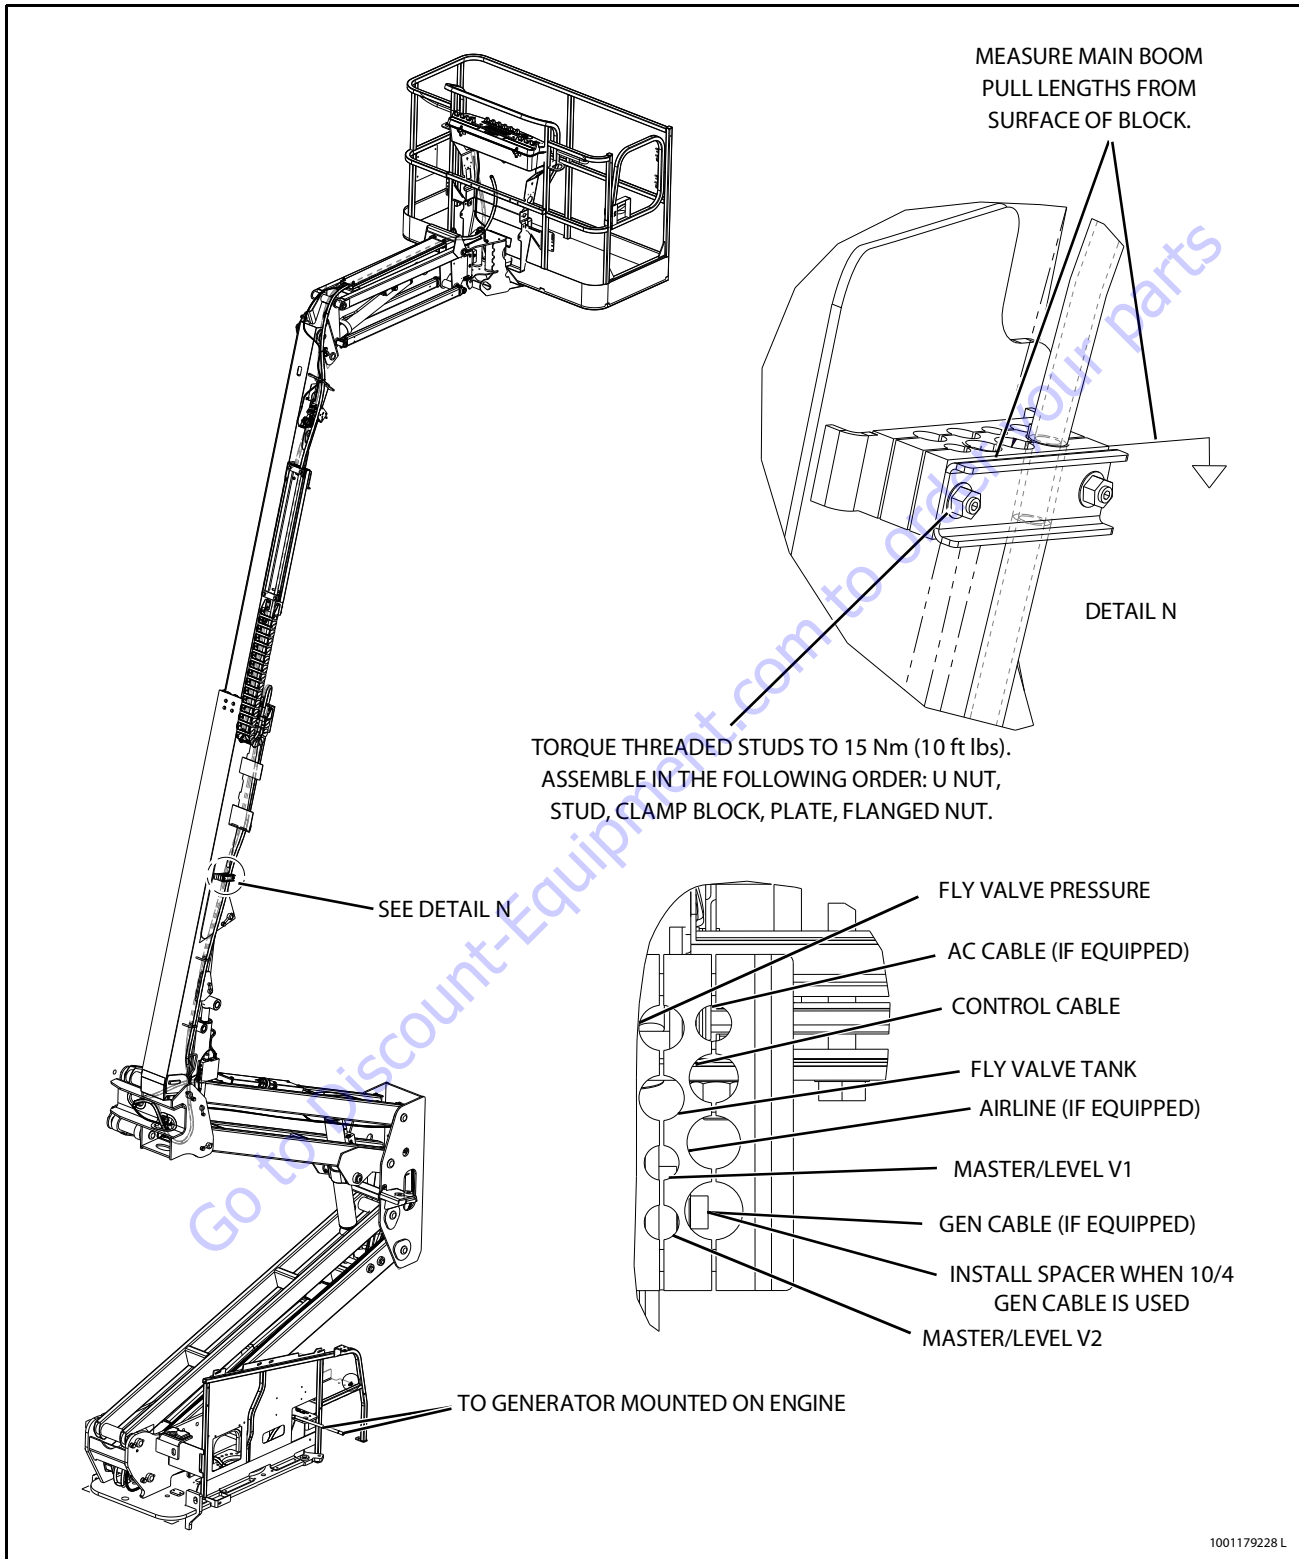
Cables and Clamps Installation - Sheet 4 of 8
